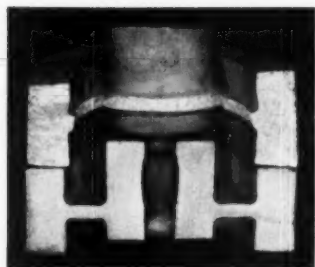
Sample casting, Lower half cut and etched; other half with hub broken from flange and flange fractured. No shrinkage, porosity nor weakness was noted. Poured at 2400 F.
